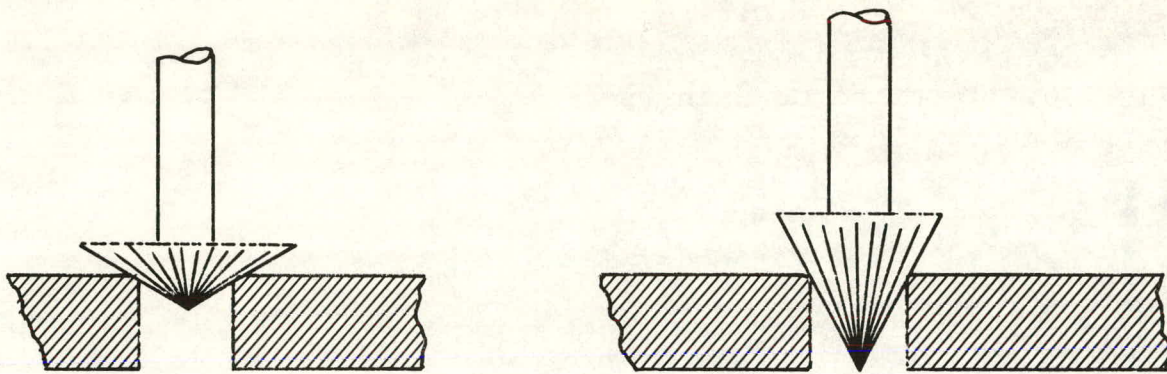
The Use of Two Cone Shaped Burs to Produce Near Burr-Free Holes
